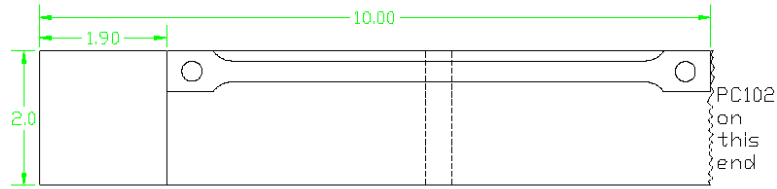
Typical Weld Metal and Weldment Specimen Cutting
